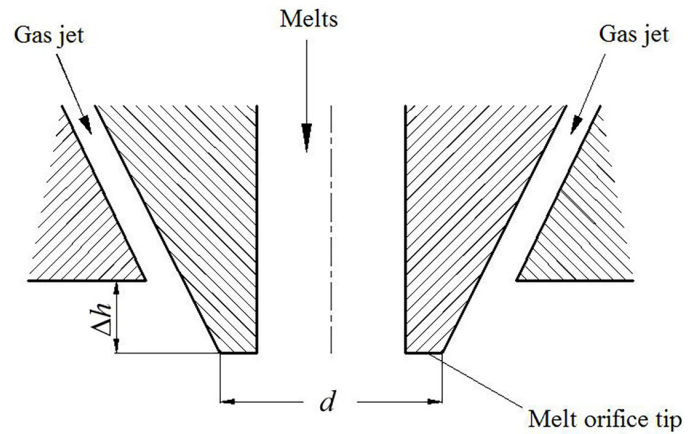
The cross-sectional view of the HPGA melts feed tube tip geometry
